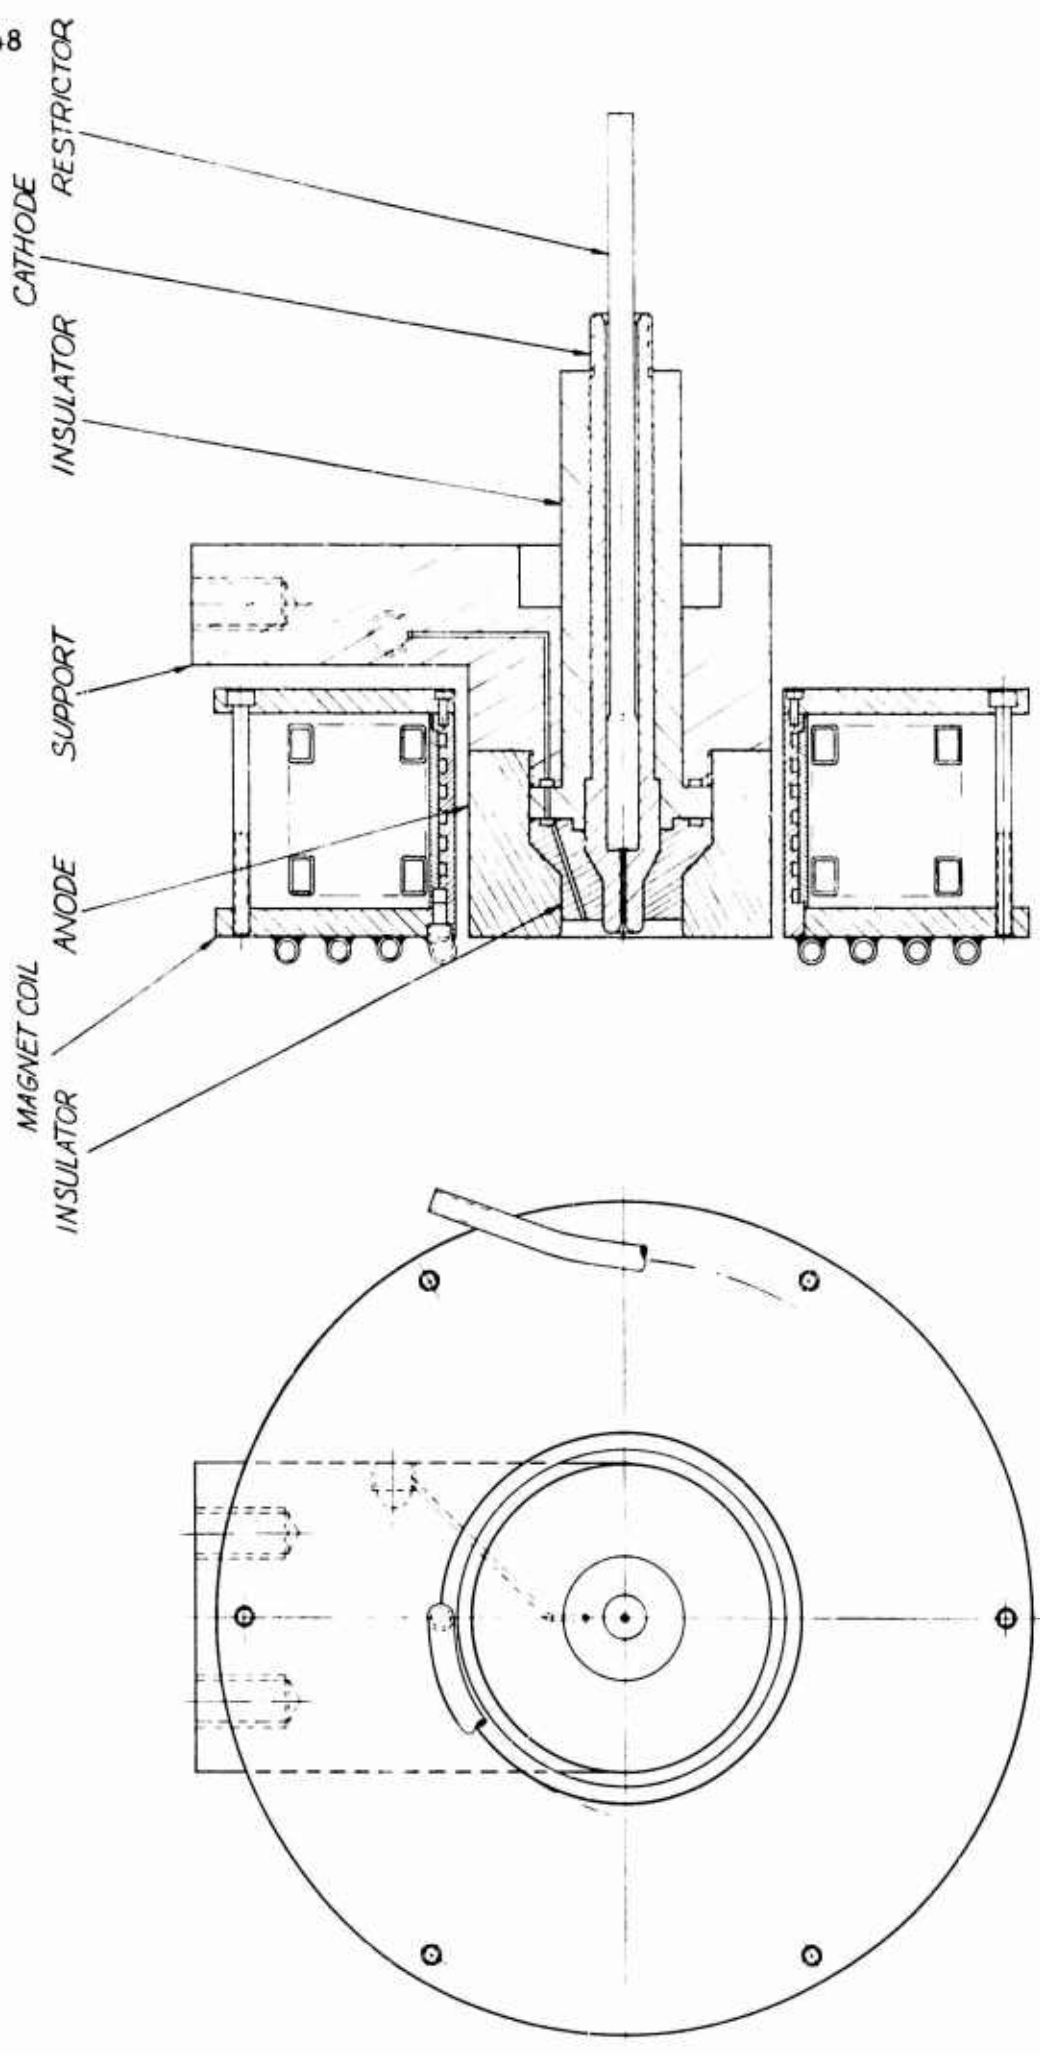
ASSEMBLY DRAWING OF LITHIUM ARC JET MODEL LAJ-CF-4
